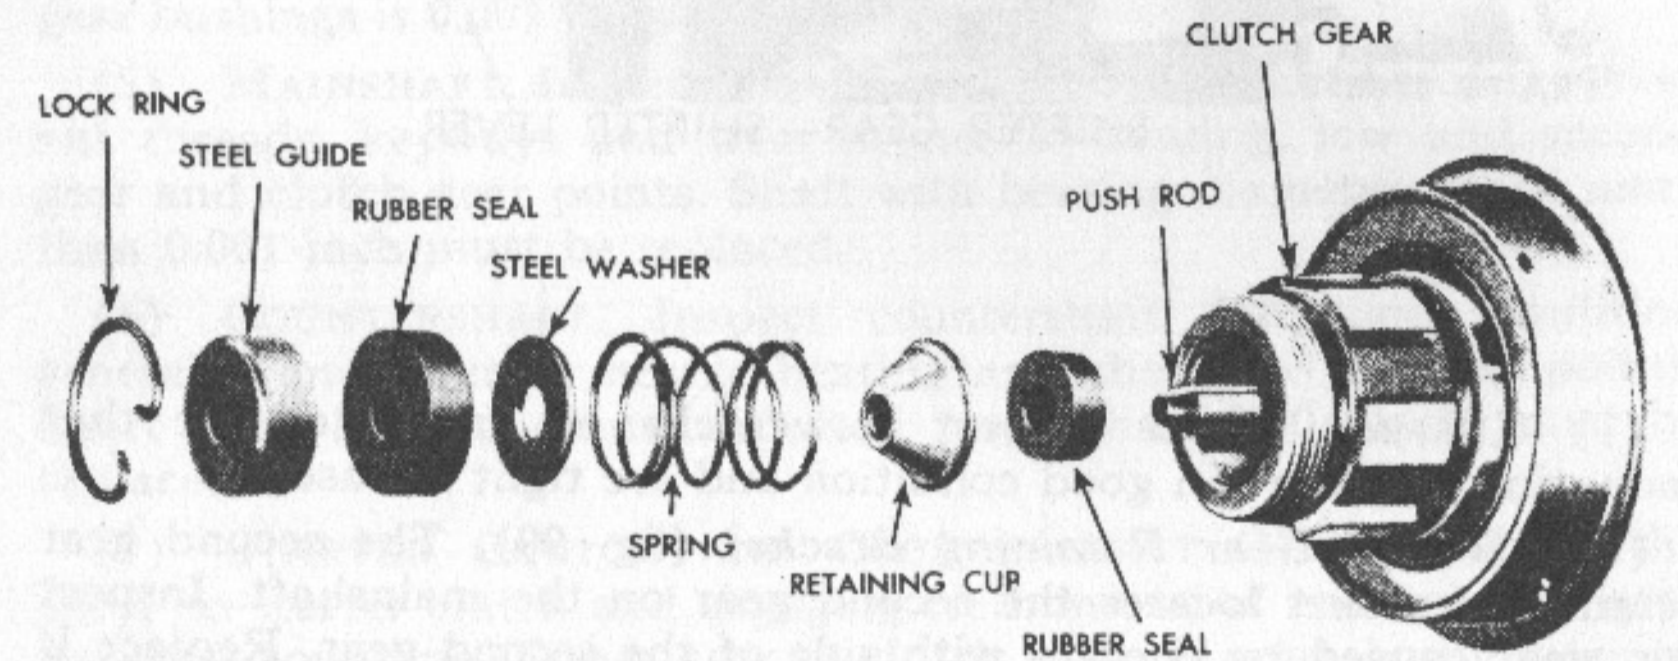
Clutch Gear and Push Rod Oil Seal, Disassembled
